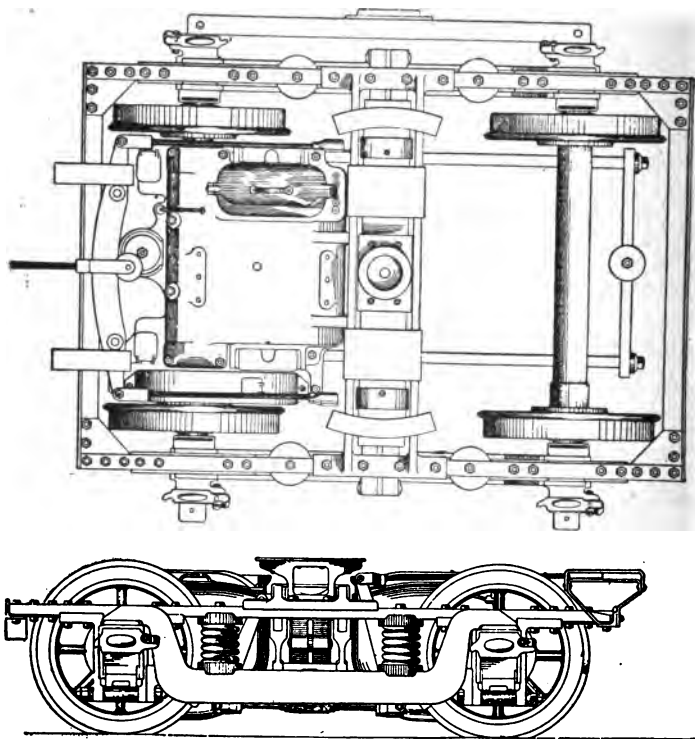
M. C. B. Electric Truck. Cradle Suspension.
